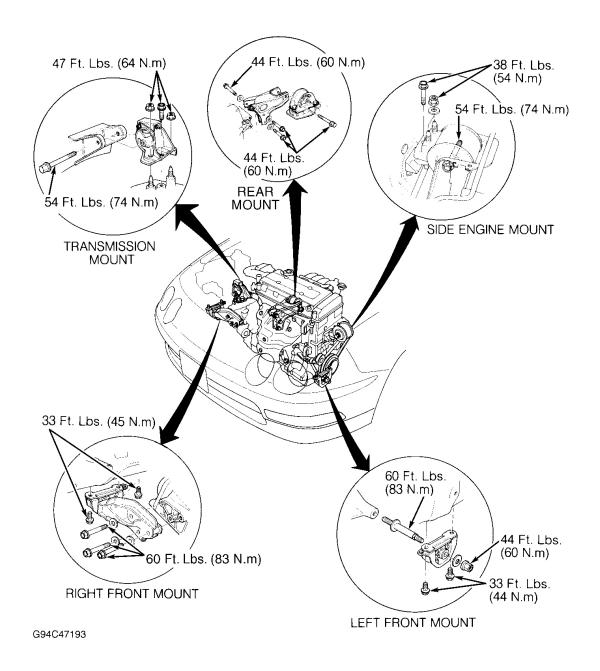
Engine/Transaxle Mount Tightening Sequence Courtesy of AMERICAN HONDA MOTOR CO., INC.
